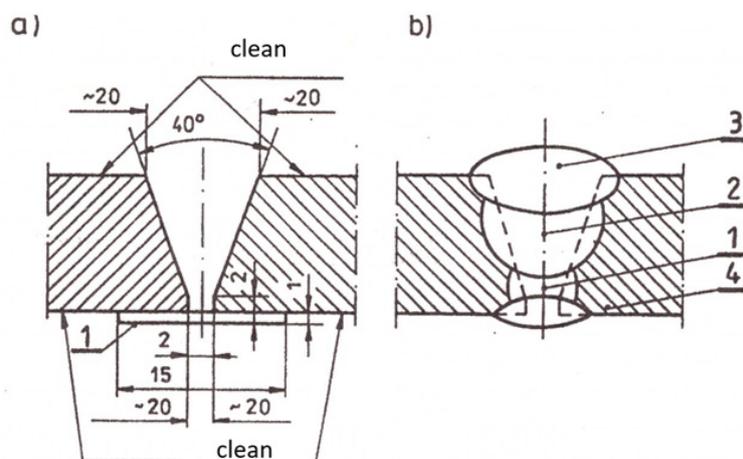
The scheme of welding: a) sheets edges preparation: 1 – copper pad, b) welding sequence: 1 – before penetration run, 2 – filling run, 3 – closing run
